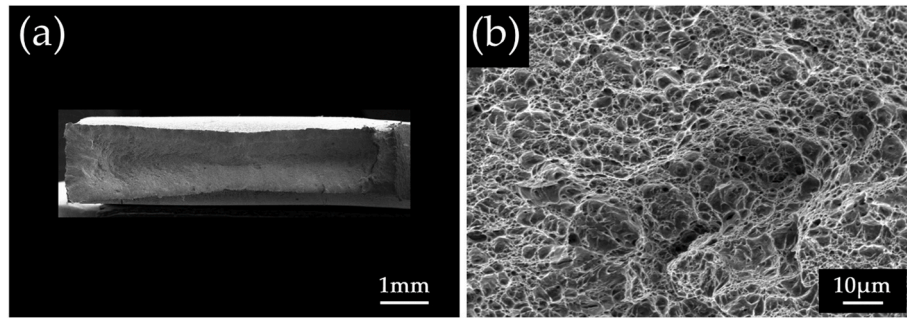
Fracture surface from the GMAW weldment.
